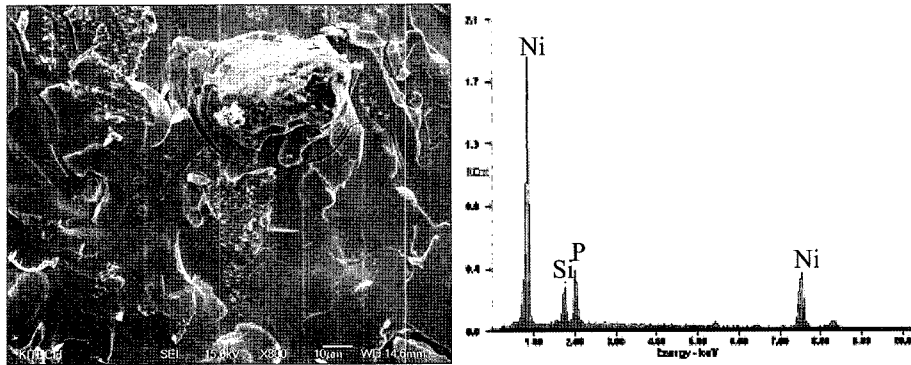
SEM photograph and EDS spectra for fracture surface of brazed specimens with BNi-7 filler metal at 1000°C.
